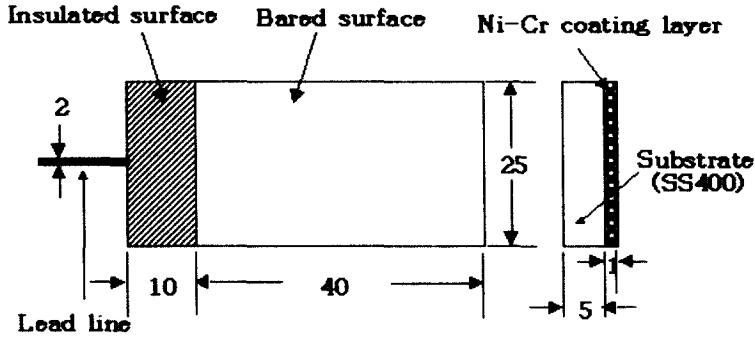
Configuration and dimension of test specimen (unit:mm)
